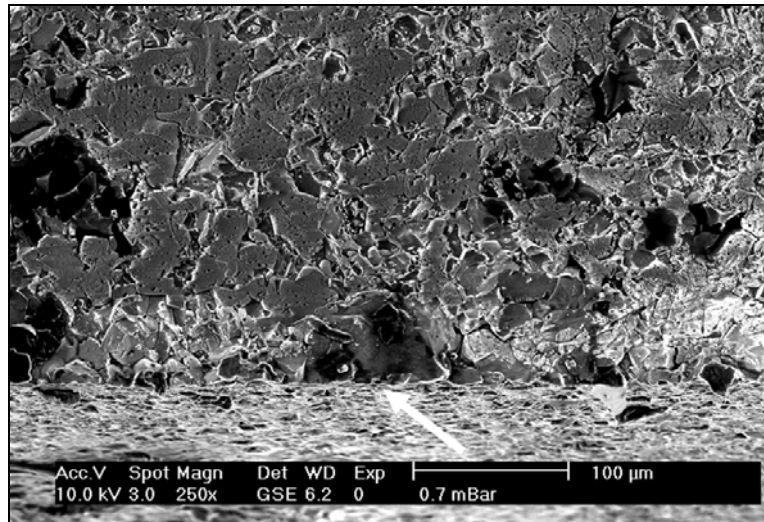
Fracture surface micrograph depicting a strength-limiting flaw in an AT alumina flexure specimen. The flaw, indicated by the white arrow, is a subsurface semi-elliptical crack induced by surface machining damage.
